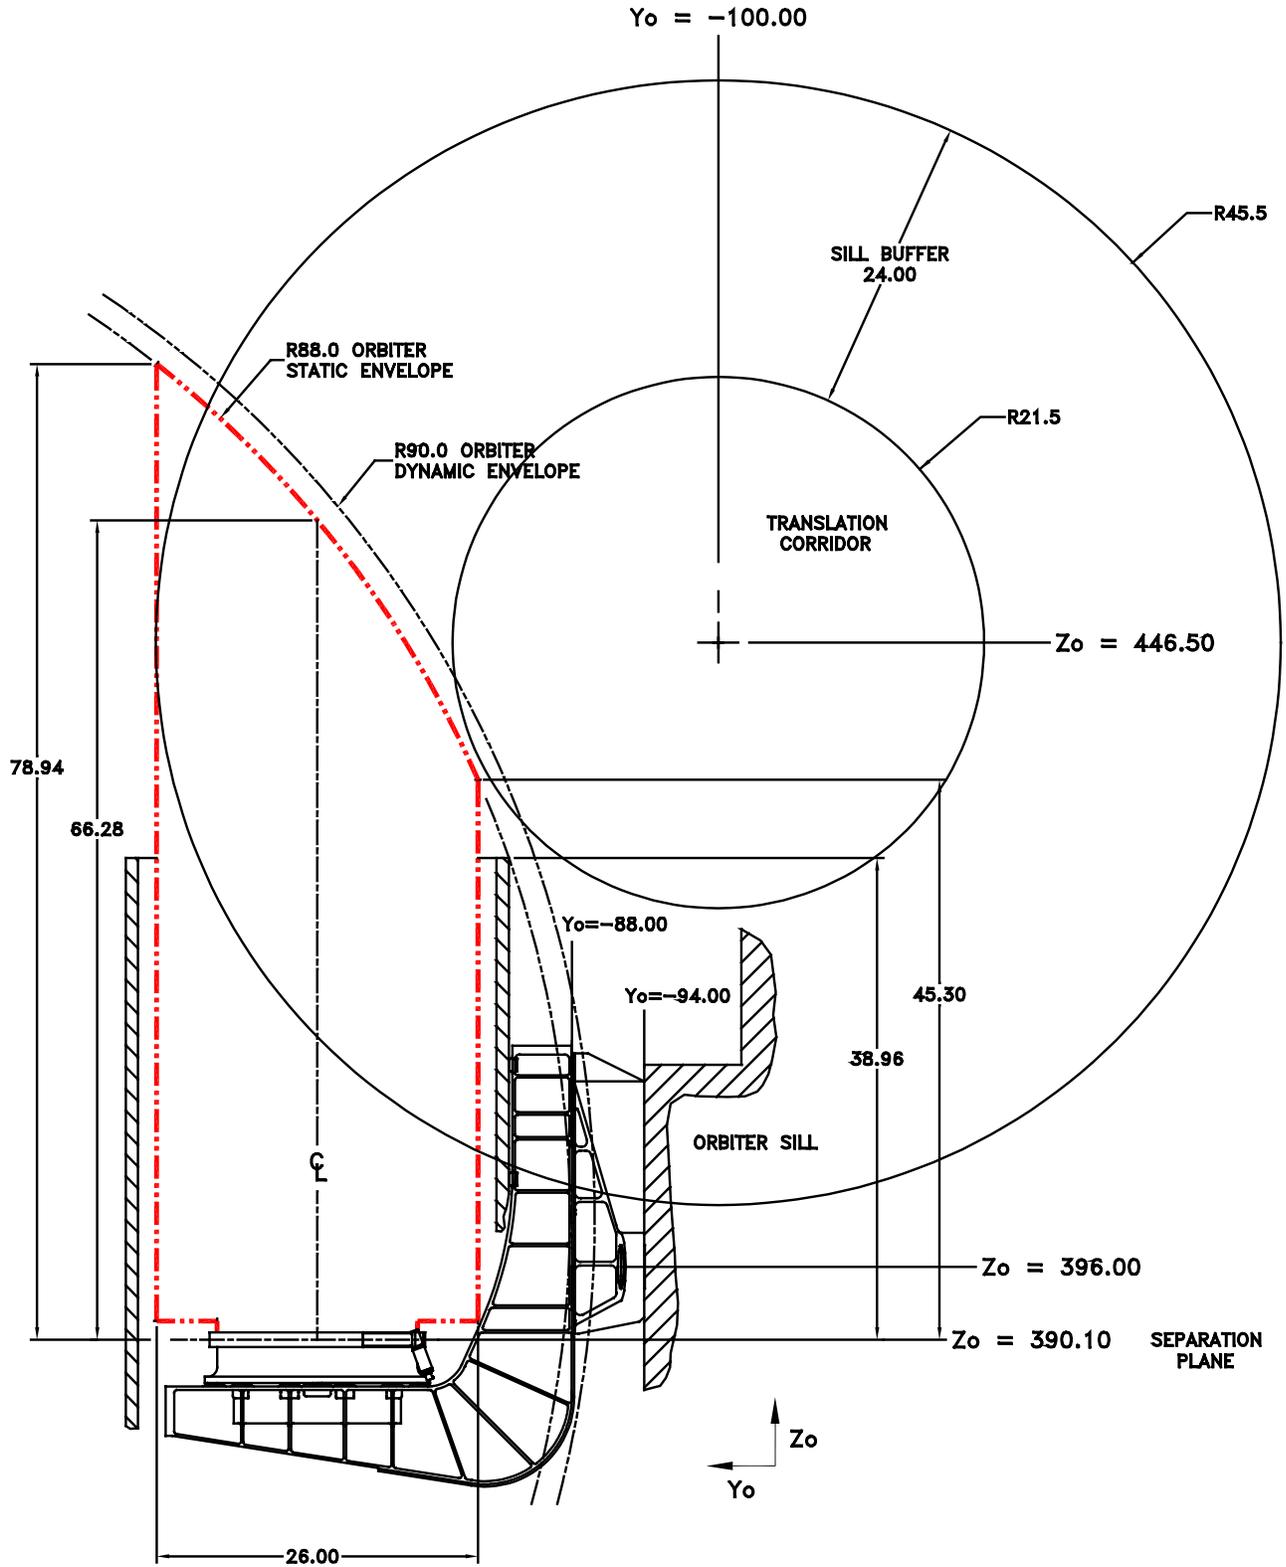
Sidewall Payload EVA Translation Corridor (port side shown)
